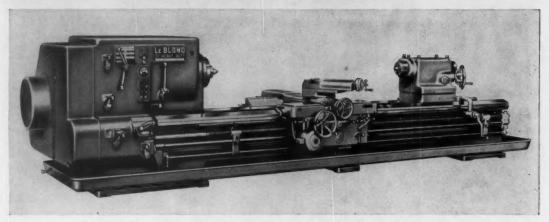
This 32-inch, heavy-duty engine lathe offers thirty-six spindle speeds
